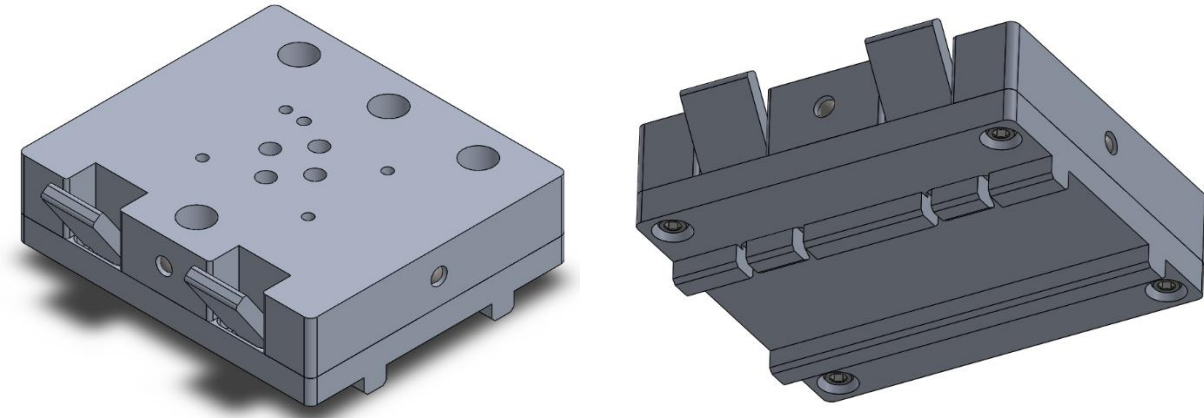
Assembly of sub-plate and quick mount plate (a) top view (b) bottom view
